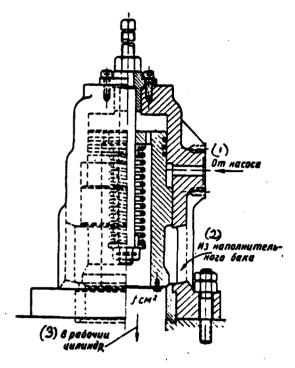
Filler valve, which is closed by the oil pressure of the forcing line of working cylinder.
